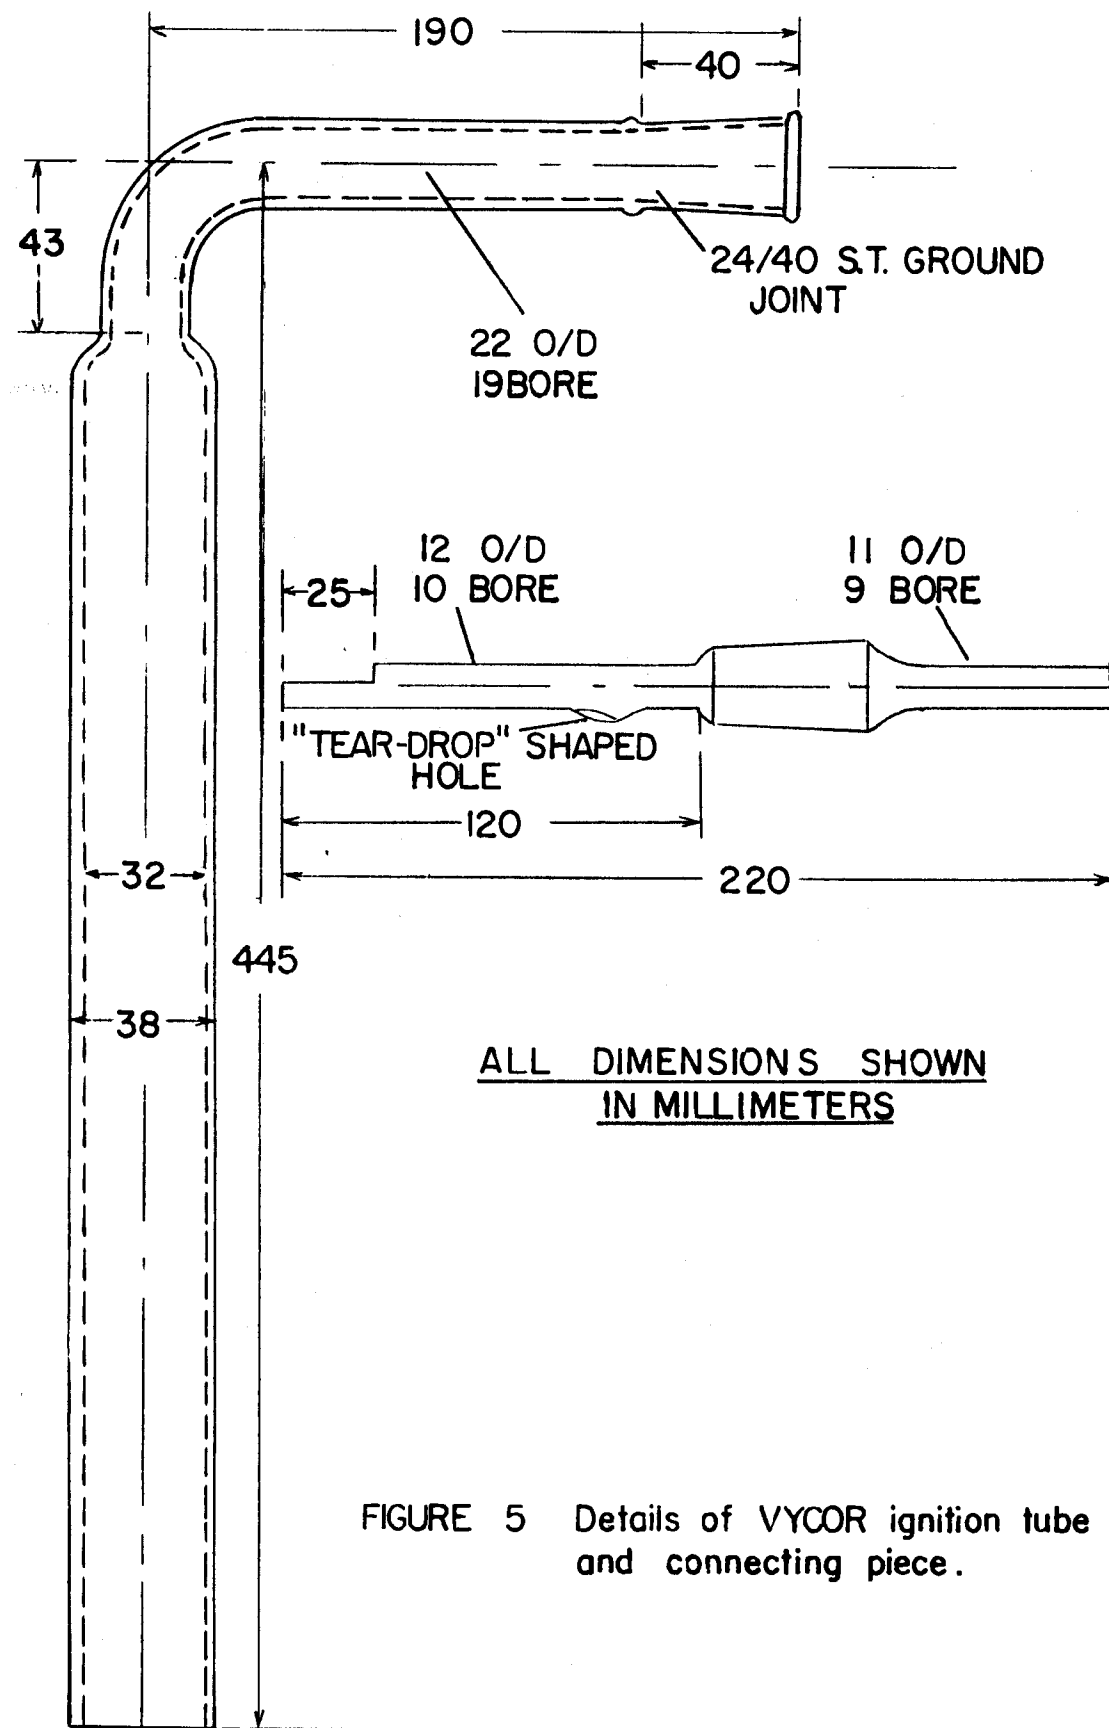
Details of VYCOR ignition tube and connecting piece.
